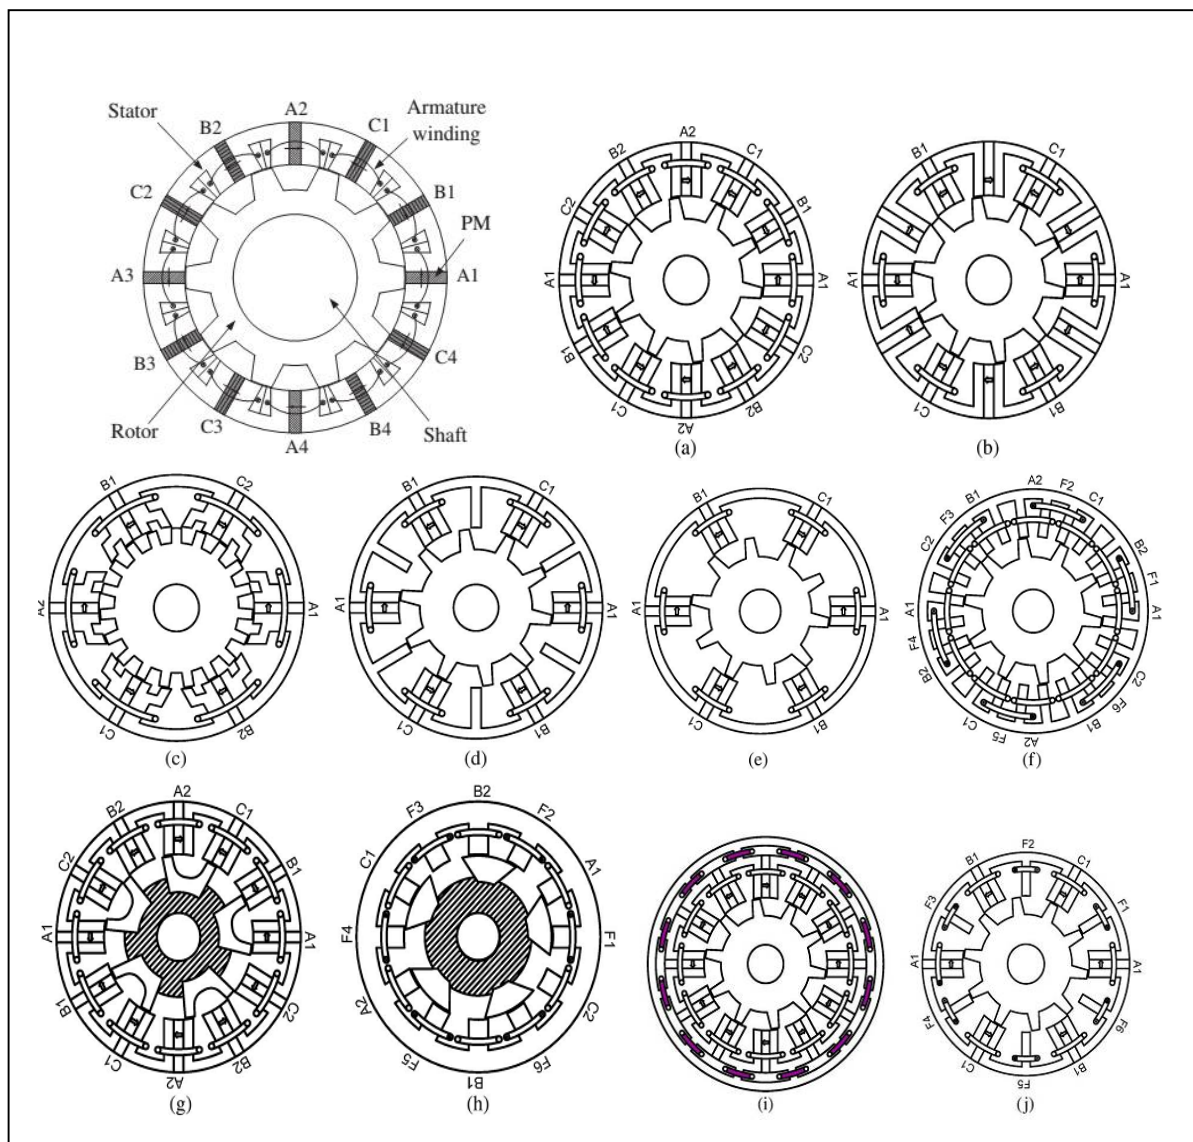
Topologies of flux-switching (FS) machines-(a) Conventional FSPM machine with all poles wound, (b) Conventional FSPM machine with alternate poles wound. (c) Multi-tooth FSPM machine. (d) E-core FSPM machine. (e) C-core FSPM machine. (f) DC winding excited FS machine. (g) Modular rotor FSPM machine. (h) Modular rotor DC winding excited FS machine. (i) Hybrid excited FSPM machines. (j) Hybrid excited E-core FSPM machine.
